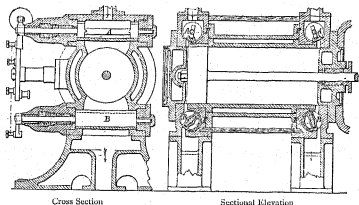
Cylinder of Steam Engine, showing arrangement of Corliss valves
